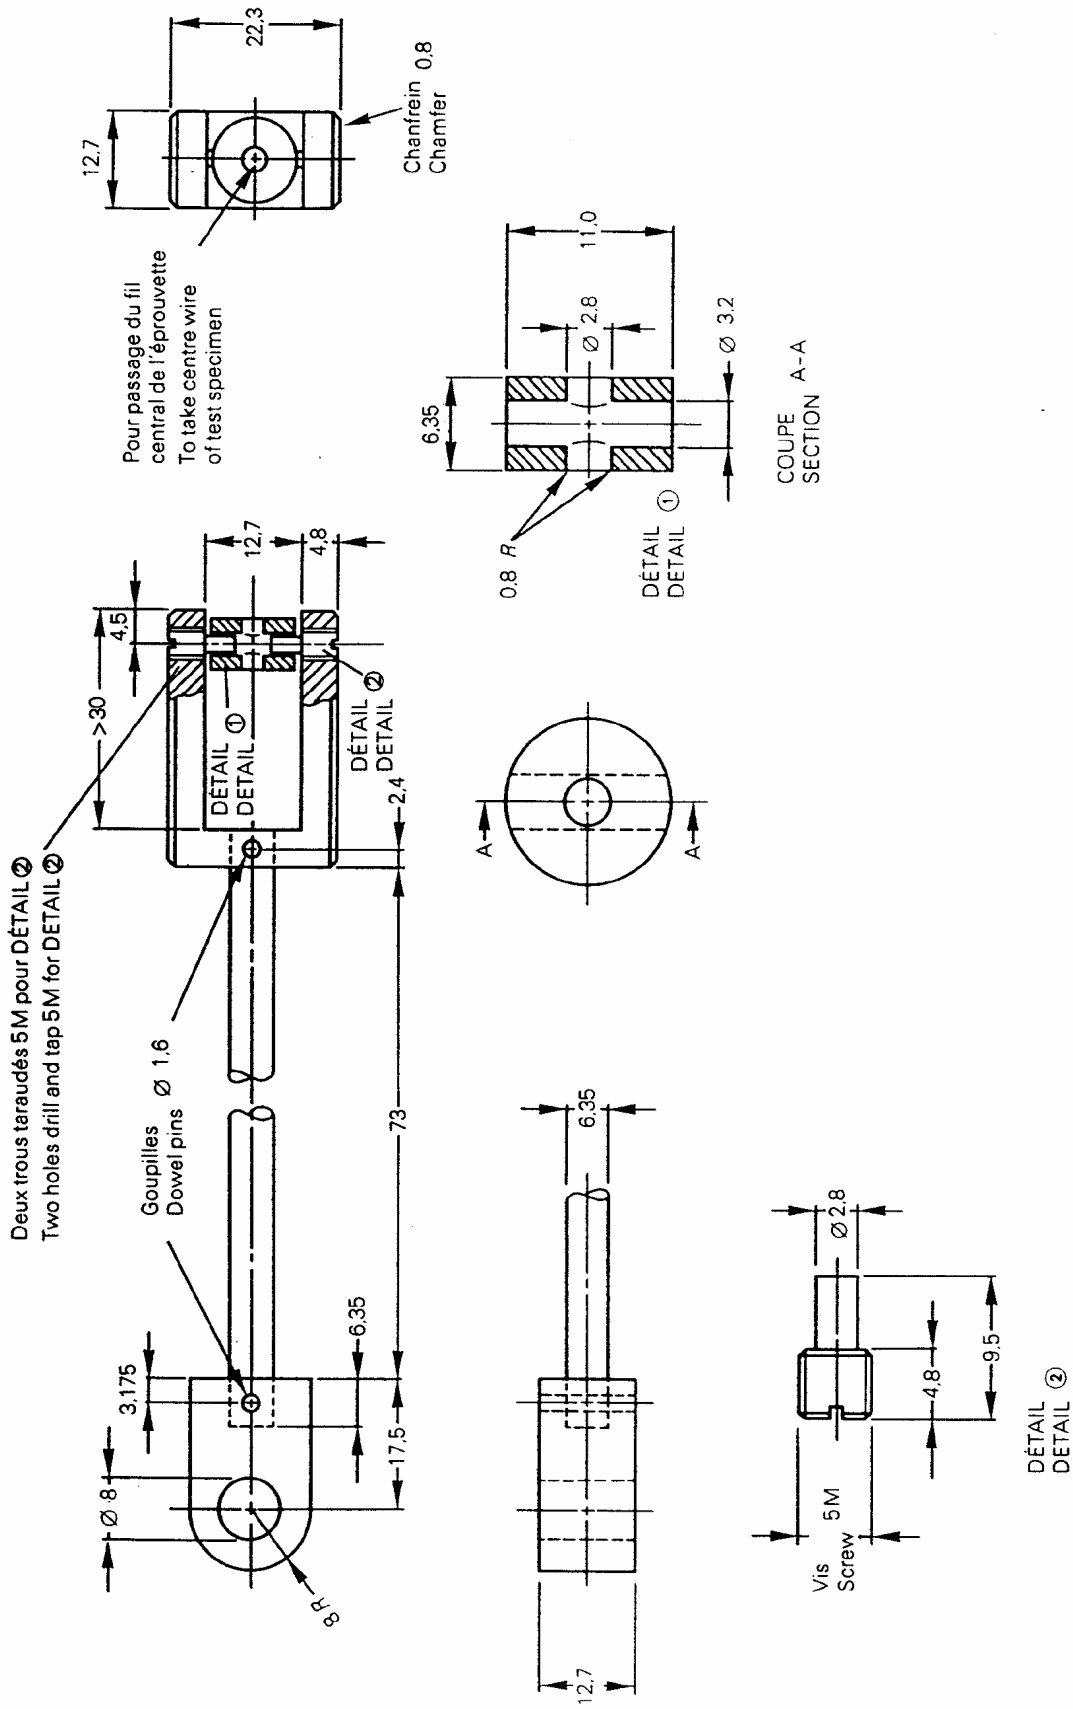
Stirrup jig for holding test specimen in tensile testing machine
